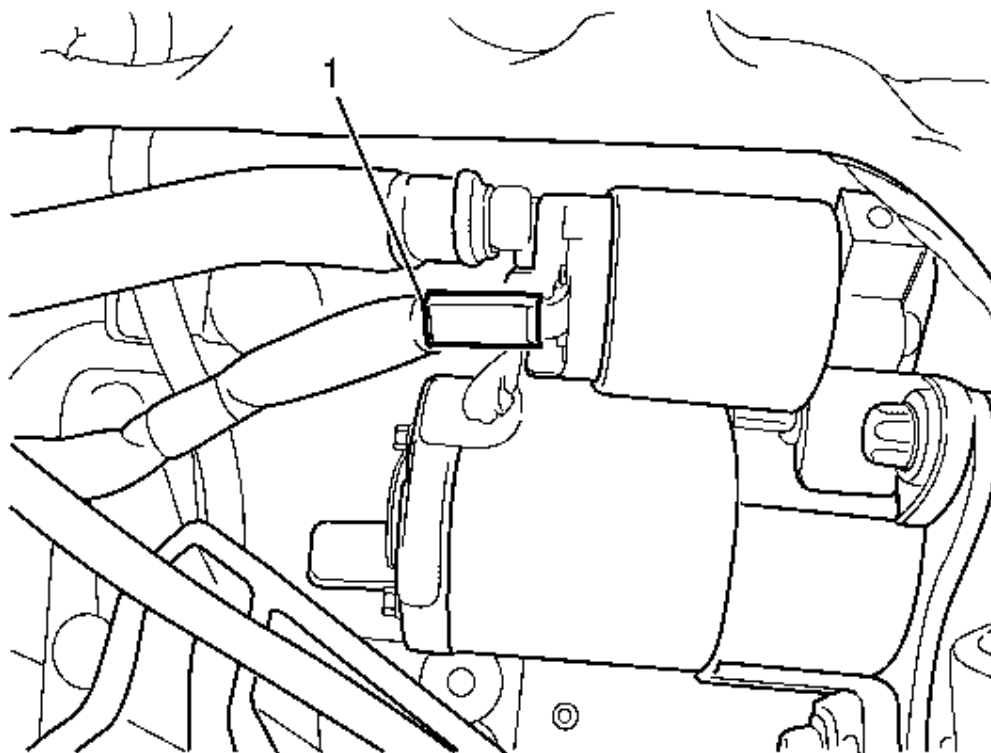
Identifying Battery Cable Harness To Starter Motor Retaining Nut
